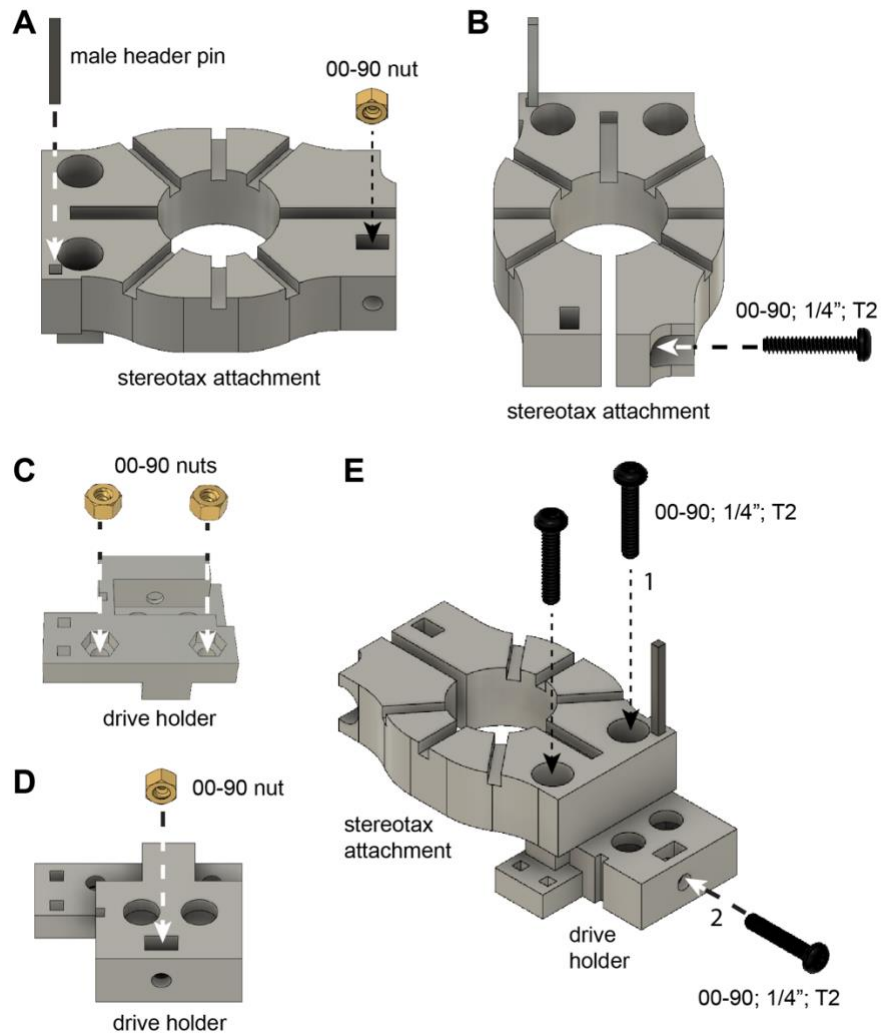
Assembly of stereotax attachment and drive holder. See instruction in section B above.
